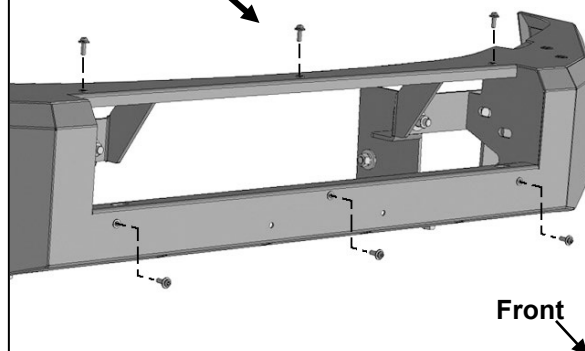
Temporarily attach Bumper to Hex Bolt in frame and Support Bracket
